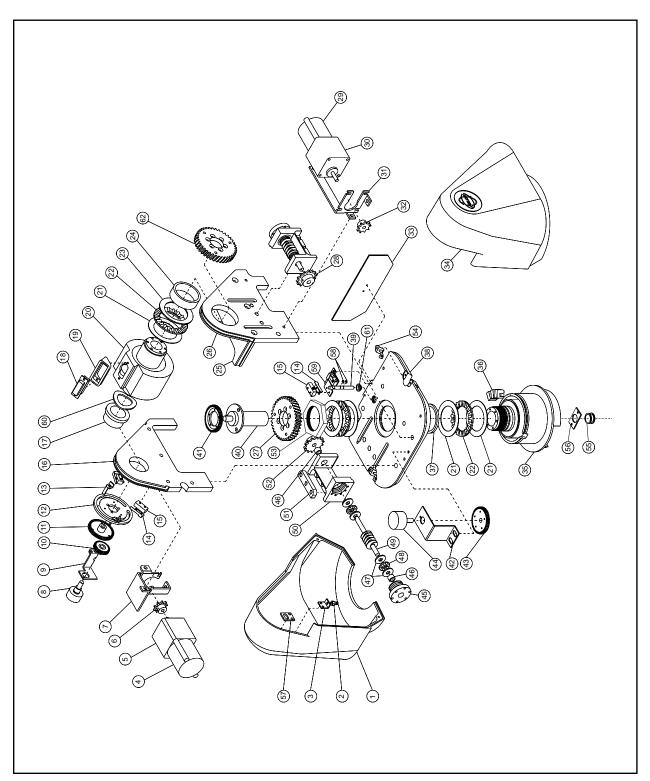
Exploded Assembly Diagram of Mechanical Parts
